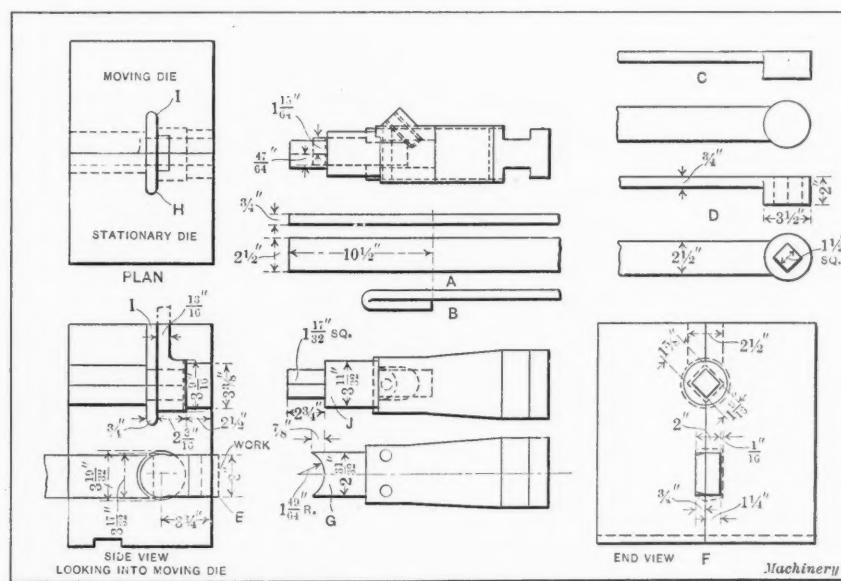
Dies and Tools used in making a Locomotive Ash-pan Handle
